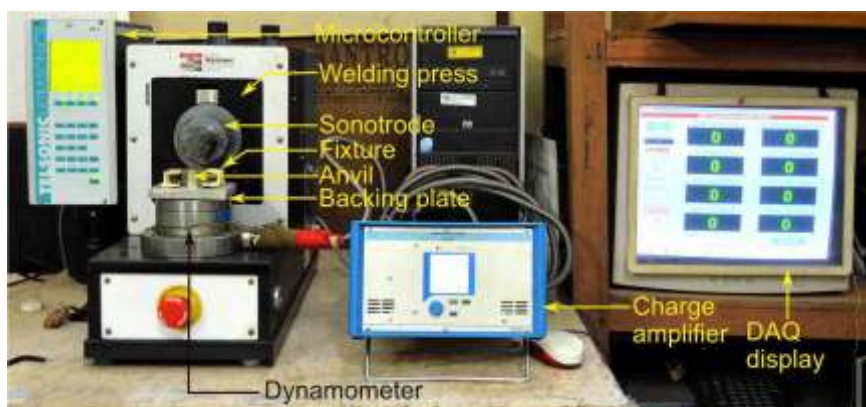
Complete setup for shear force measurement during welding
